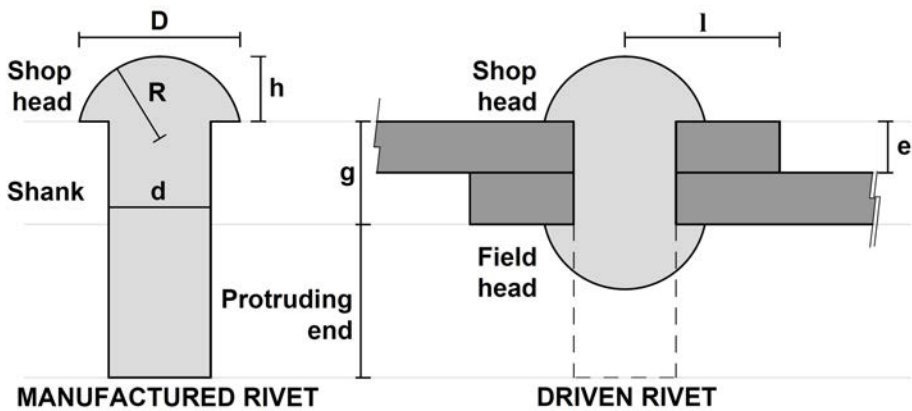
Geometrical parameters defining a rivet (left) and a riveted connection (right)
